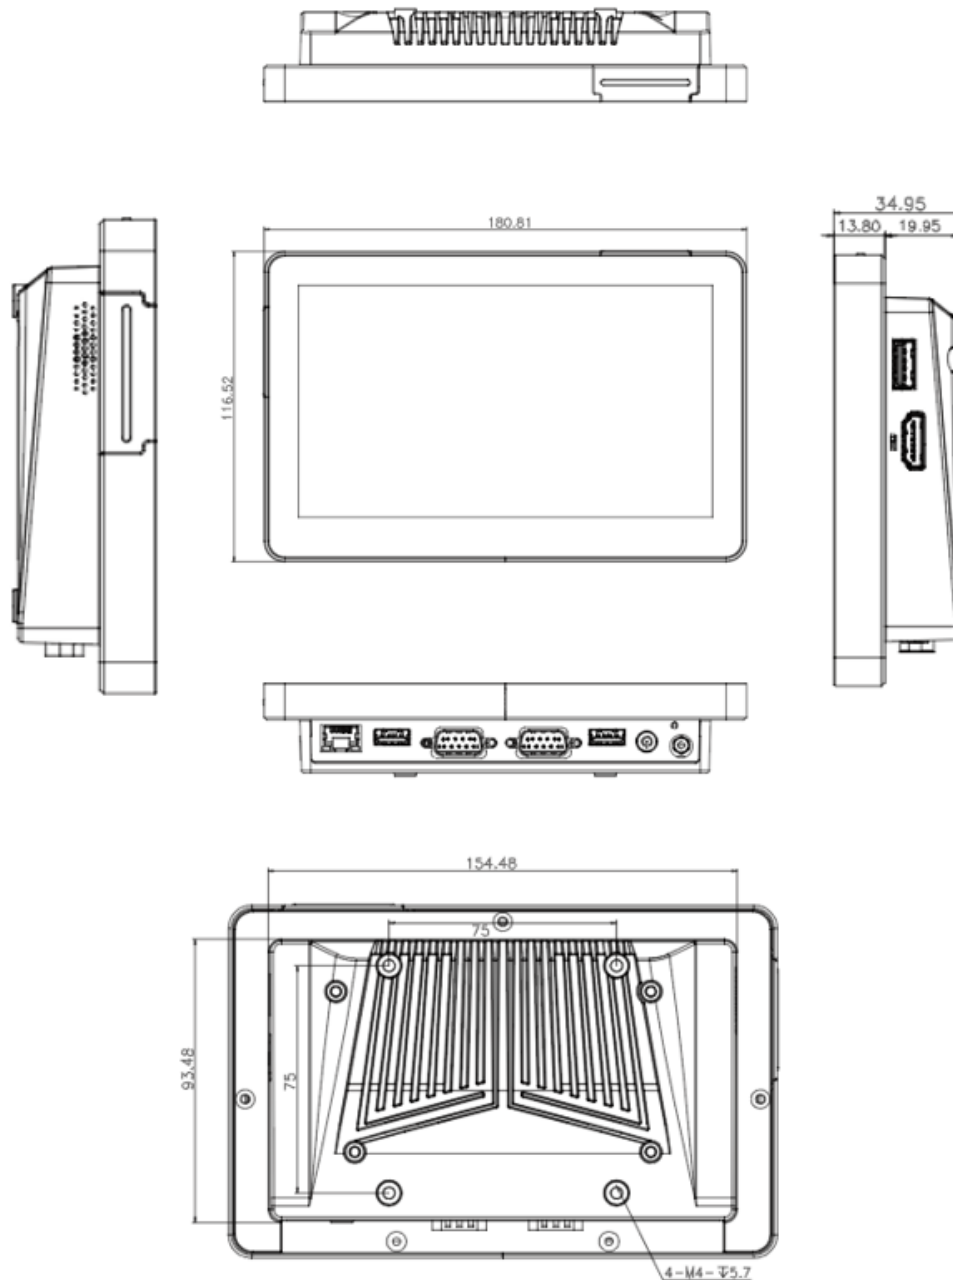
AFL4-W07-EHL Dimensions (mm)
